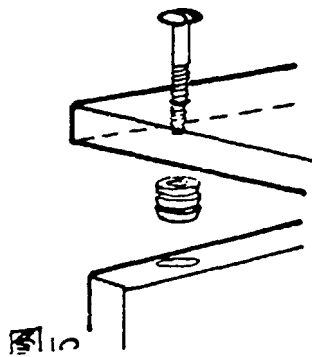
Reverse teeth screws and plastic expansion tubes used for joining.
